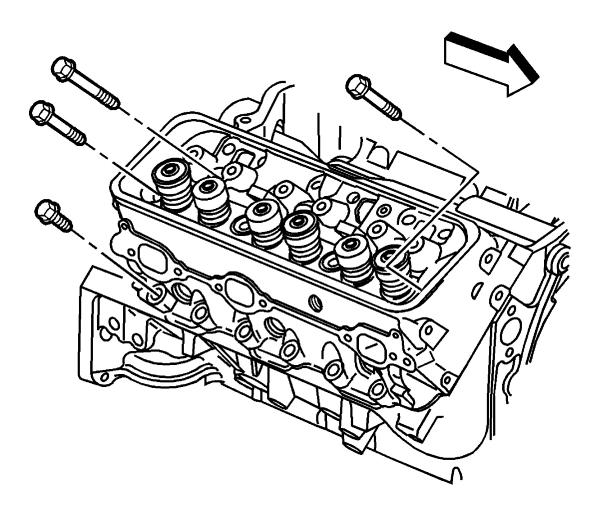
Locating Cylinder Head Bolts (Right) Courtesy of GENERAL MOTORS CORP.
